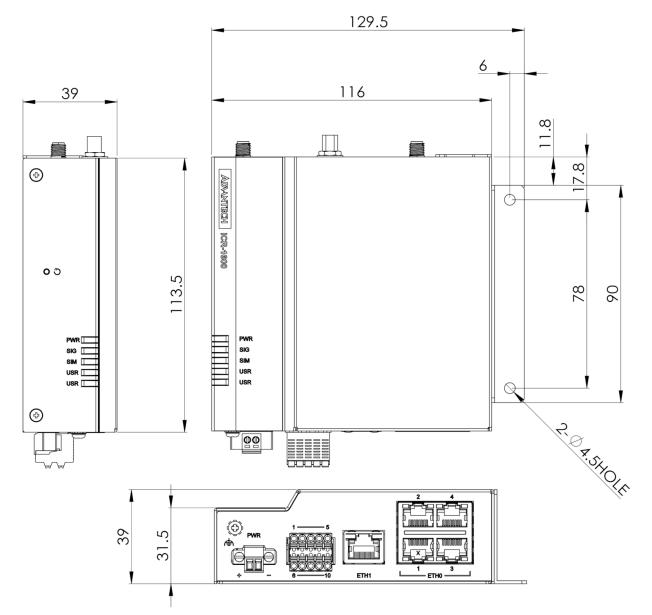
Router Dimensions - Front, Top and Right view with Wall Mounting holder
